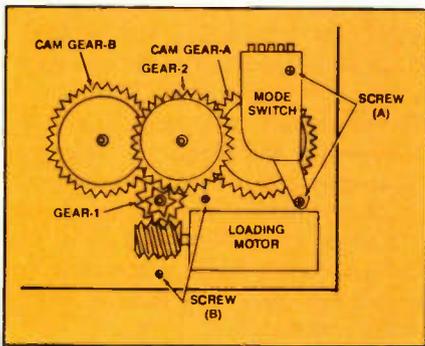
To remove the mode switch assembly, first disconnect the DS and DQ plugs from the assembly. Then remove the two mounting screws (A), and the mode switch.
